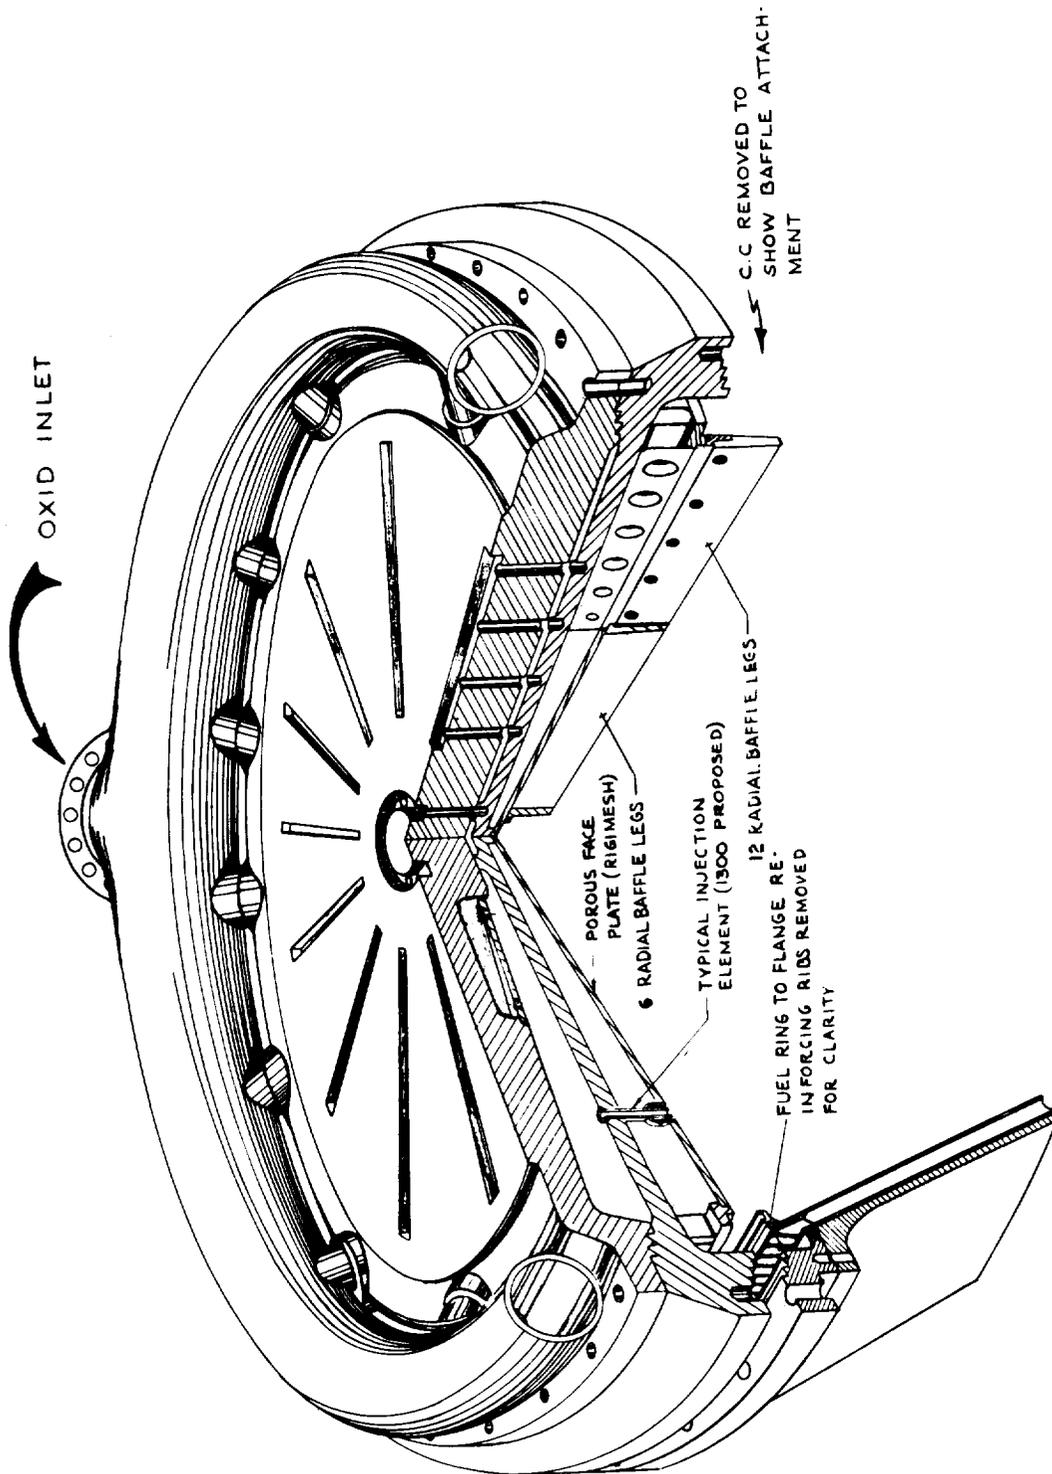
M-1 Coaxial Injector, 12-Rib Bolt-On Dome
